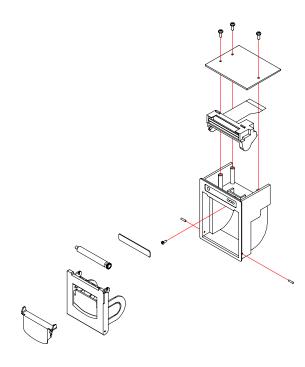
Printer Disassembly - Printer Board, Printer Body Case, Printer Opener Case, Printer Door Case, Printer Mecha, Printer Door Pin, Printer Paper
